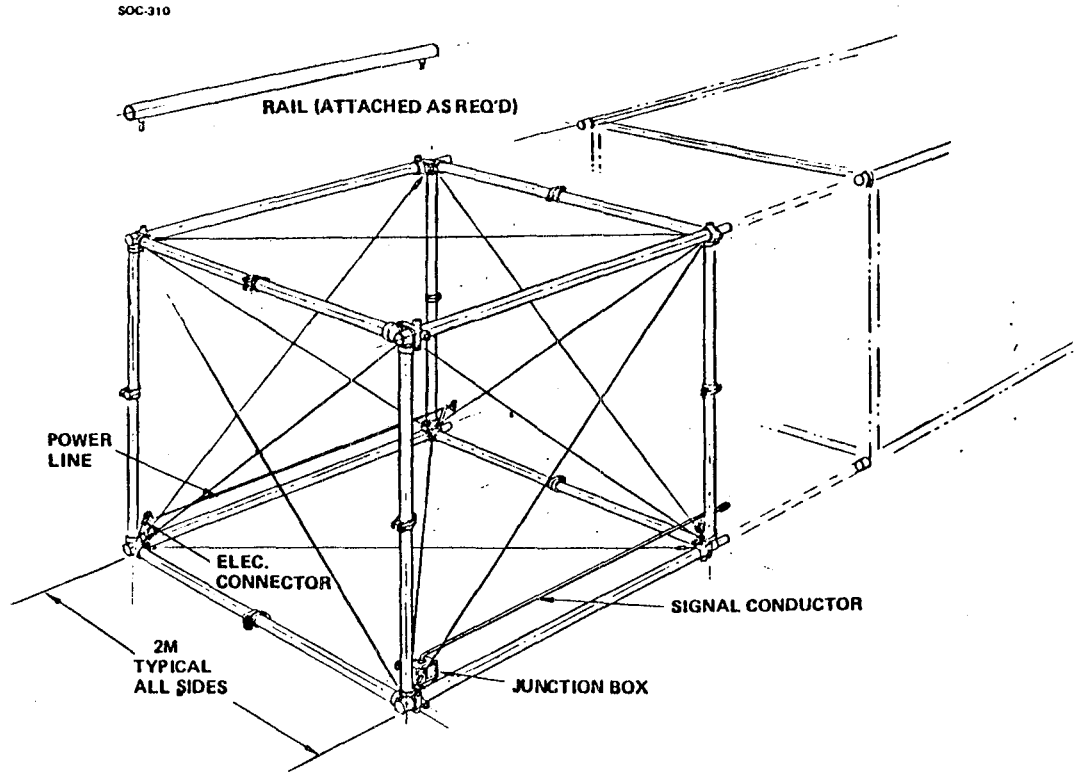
Figure B. Modular Construction Fixture Structural Building Block Deployed Configuration
